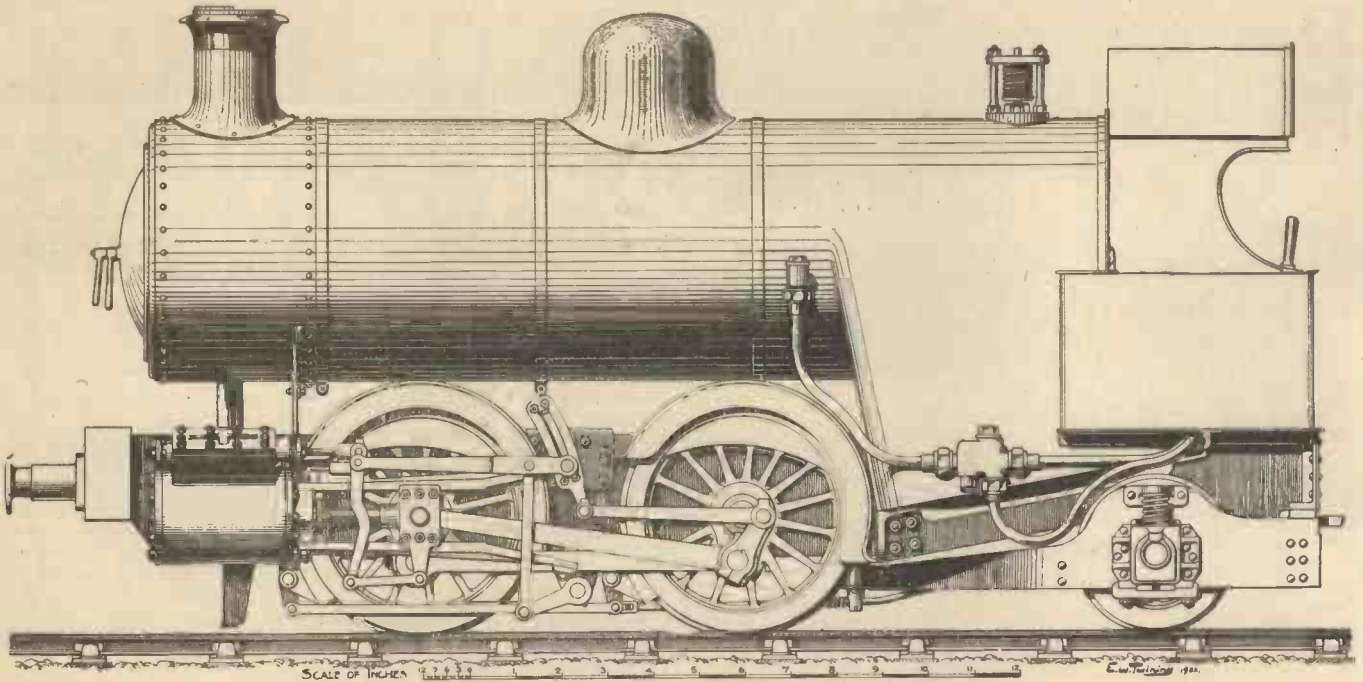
The chimney and dome shortened to come within the scale loading gauge.
